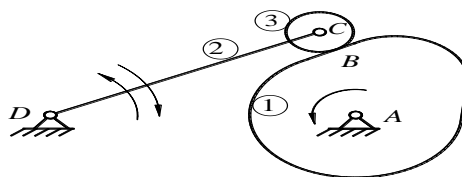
Mechanism with rotating cam and rotating roller cam follower, [5]
